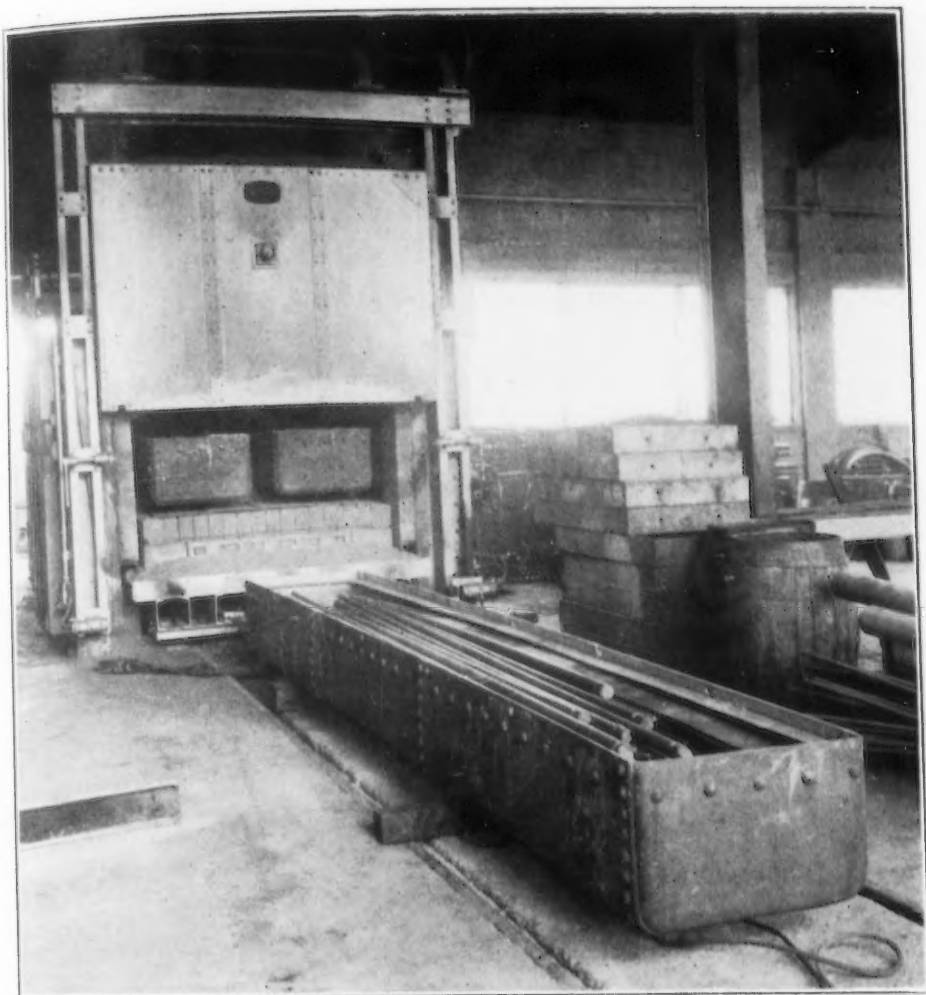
Car-type Furnace for Annealing Tool Steel Bars in Boxes.
